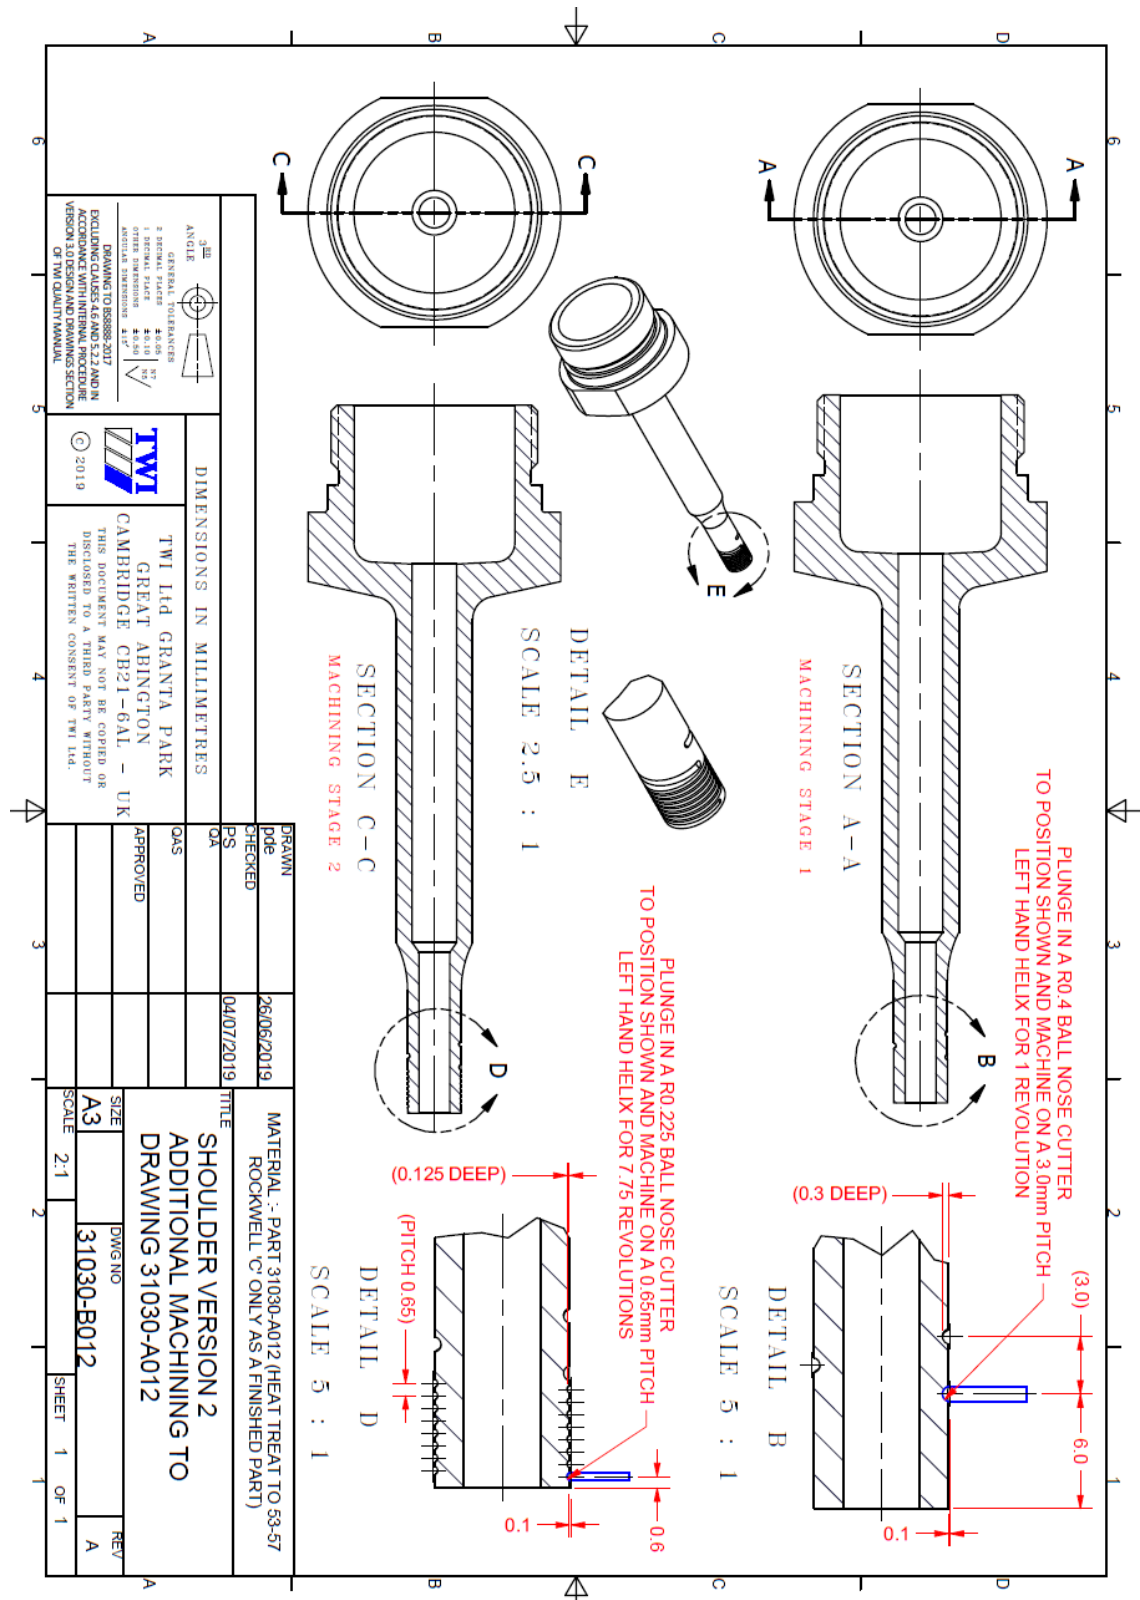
Technical drawing of the RFSSW threaded shoulder component. (Tool 3)
